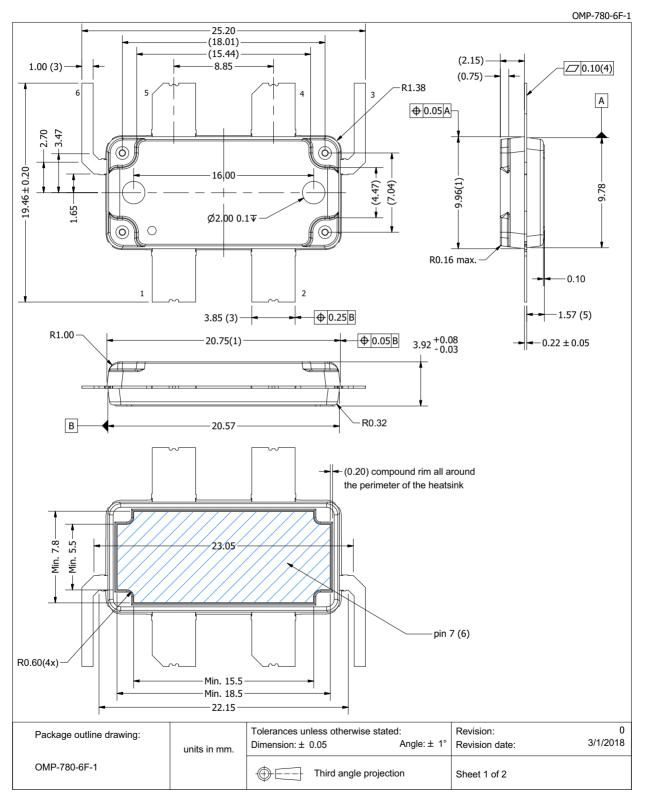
Package outline OMP-780-6F-1 (sheet 1 of 2)
